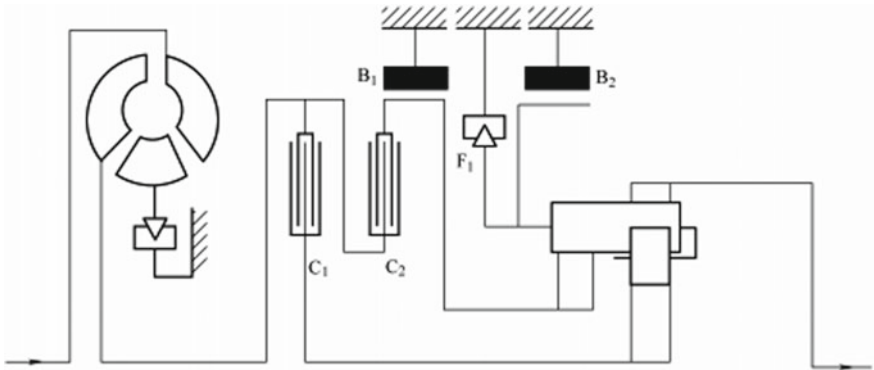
Ravigneaux planetary gear train. B₁—2 speed brake, B₂—low and reverse gear brake, C₁—forward clutch, C₂—reverse and high gear clutch, F₁—1 speed OWC
